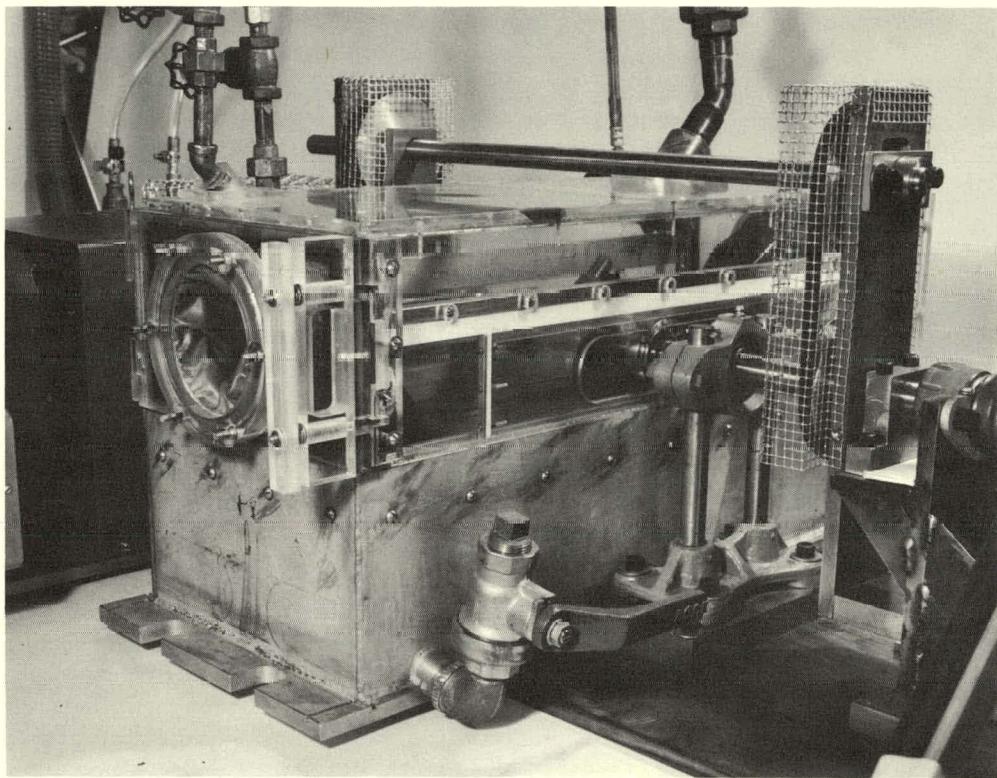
Dry box for semiautomatic welding of thin stainless steel encapsulations of plutonium disks.
